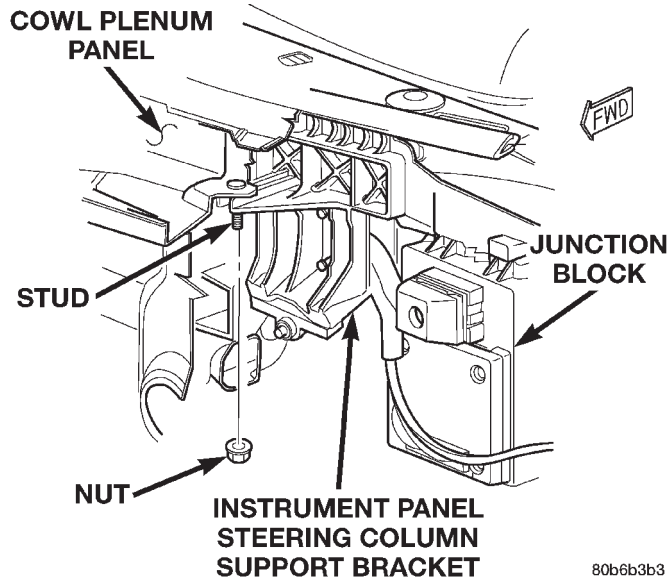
Instrument Panel to Cowl Plenum Mounting
